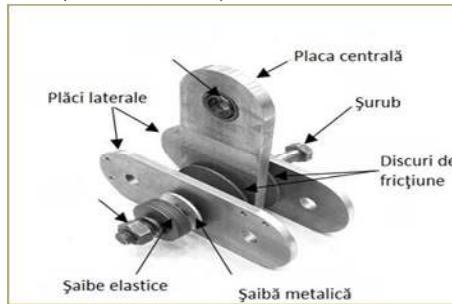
„Details of Damptech friction damper” (Muala, 2000)
